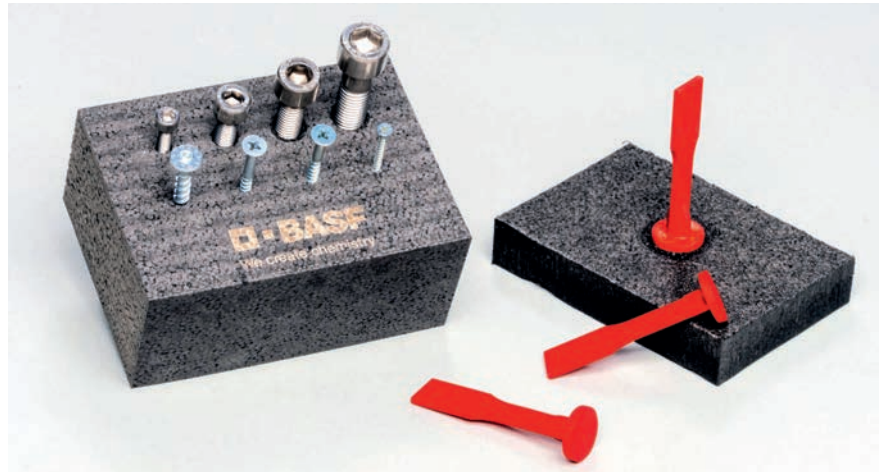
EPA is suitable for screw connections with and without preparation (left) and for welding with injection-molded additional components (right). © BASF
